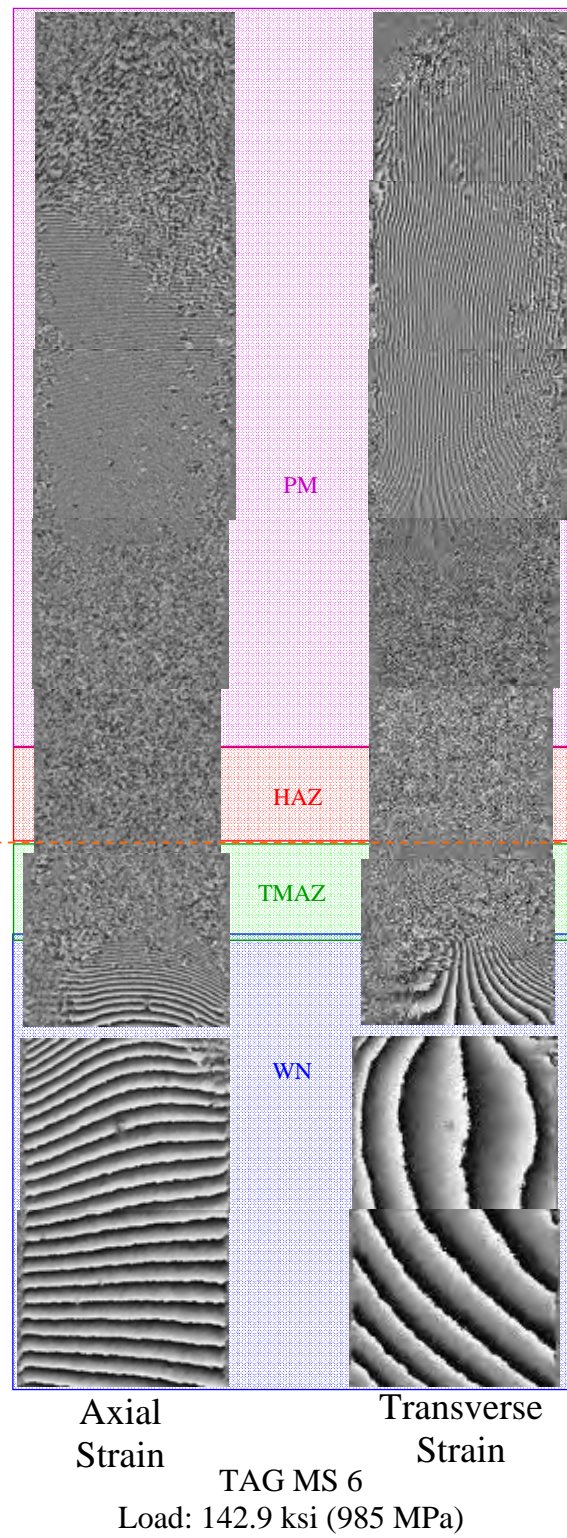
TAG MS 6 retreating side weld detail step 3
